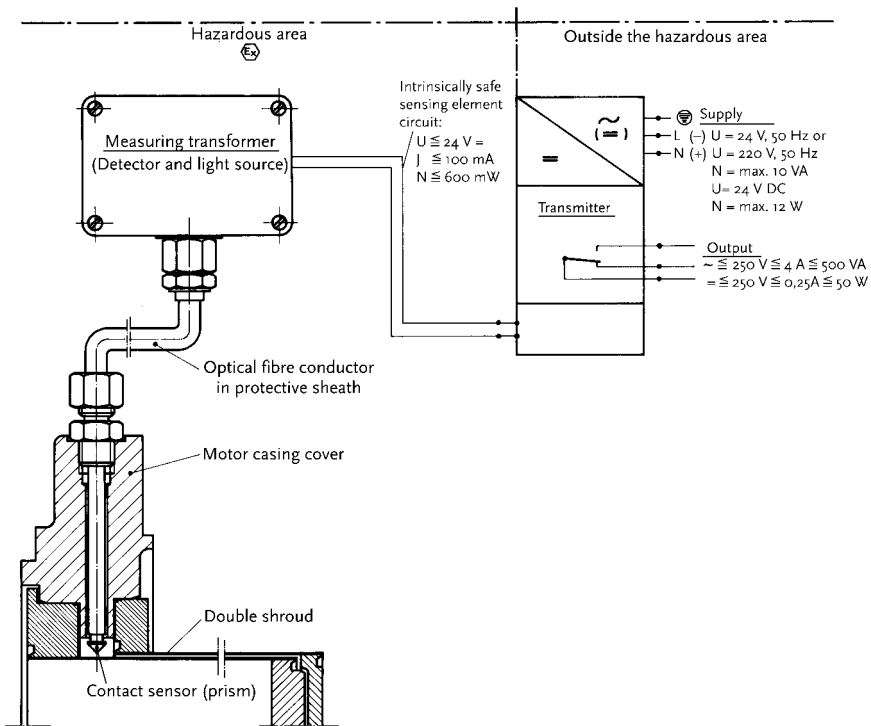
Example of a fiber-optic measuring point on a double-can tube design motor (factory drawing of Lederle-Hermetic)
